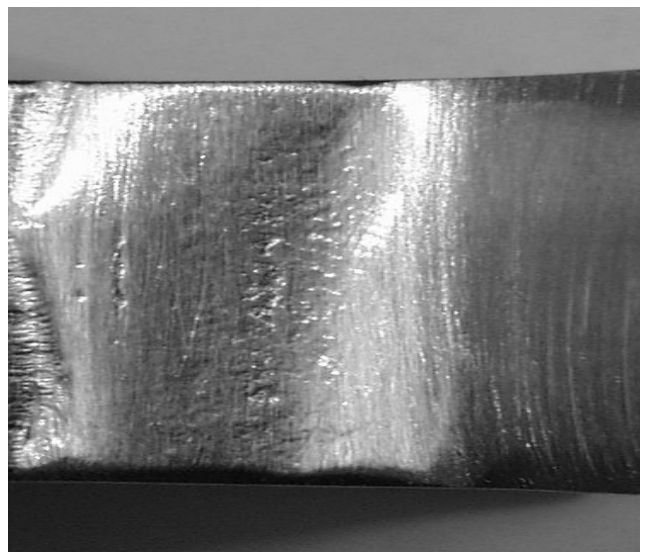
Macrostructure of the HAZ after corrosion test; heat input 4,5 kJ/mm; no pitting corrosion
